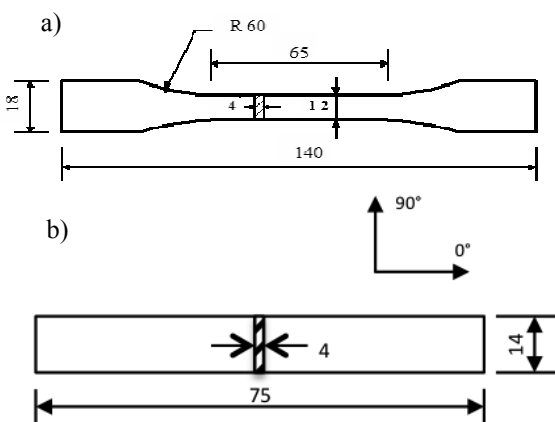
Geometry and dimensions of specimens. a) Tension; (b) Bending.
